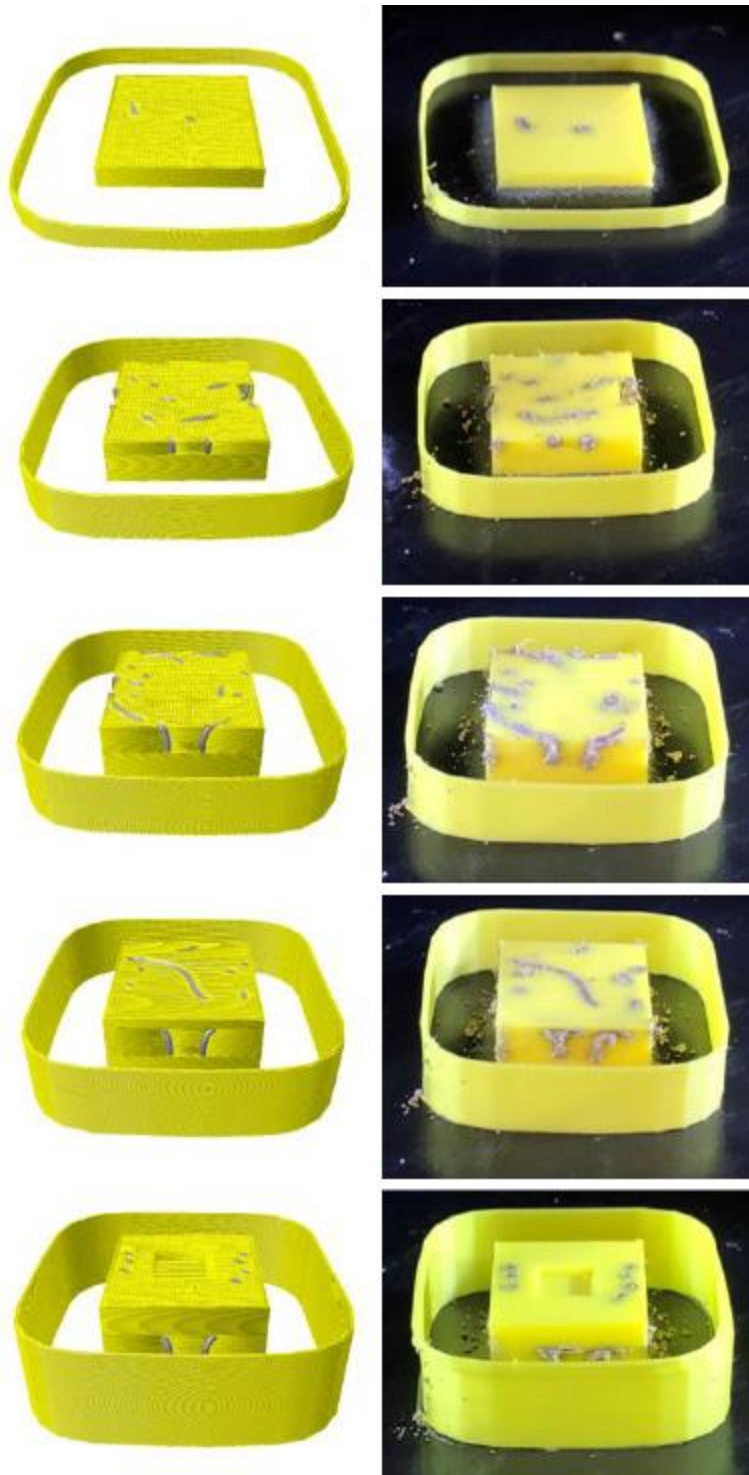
(Left) Modeled tool paths. (Right) Printed tool paths. [25]
